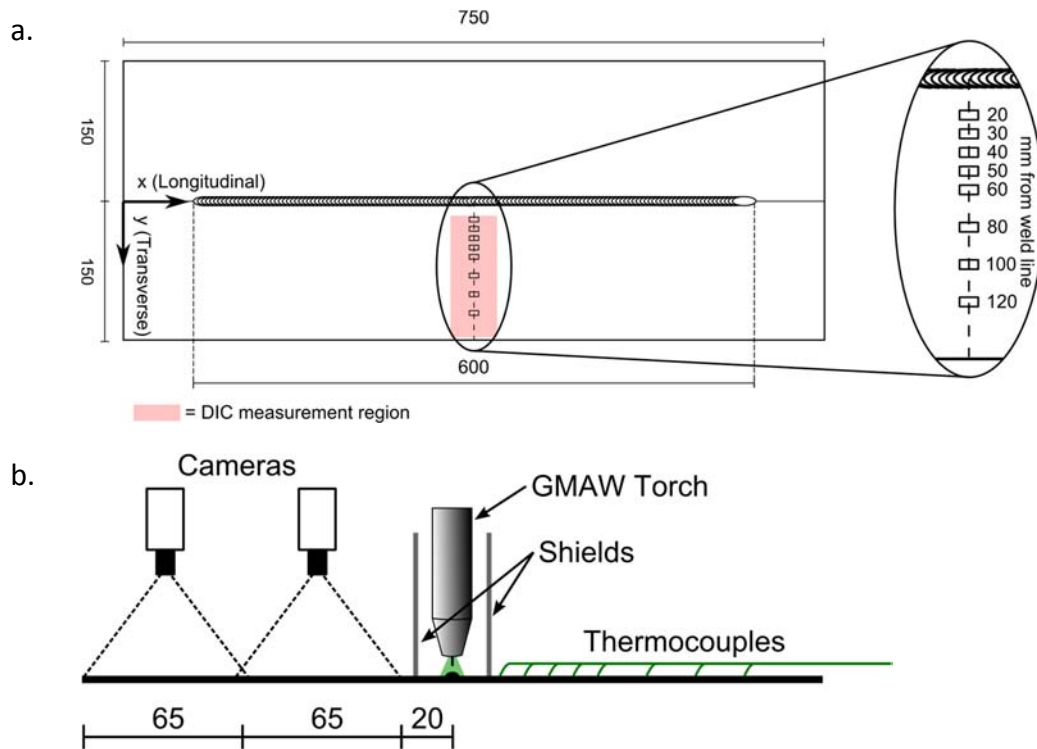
(a.) Specimen layout for welding experiments (a butt weld is shown; bead-on-plate welds each used a single 300 x 750 mm plate). (b.) Measurement setup for digital image correlation, showing a view down the weld line (dimensions in mm).
